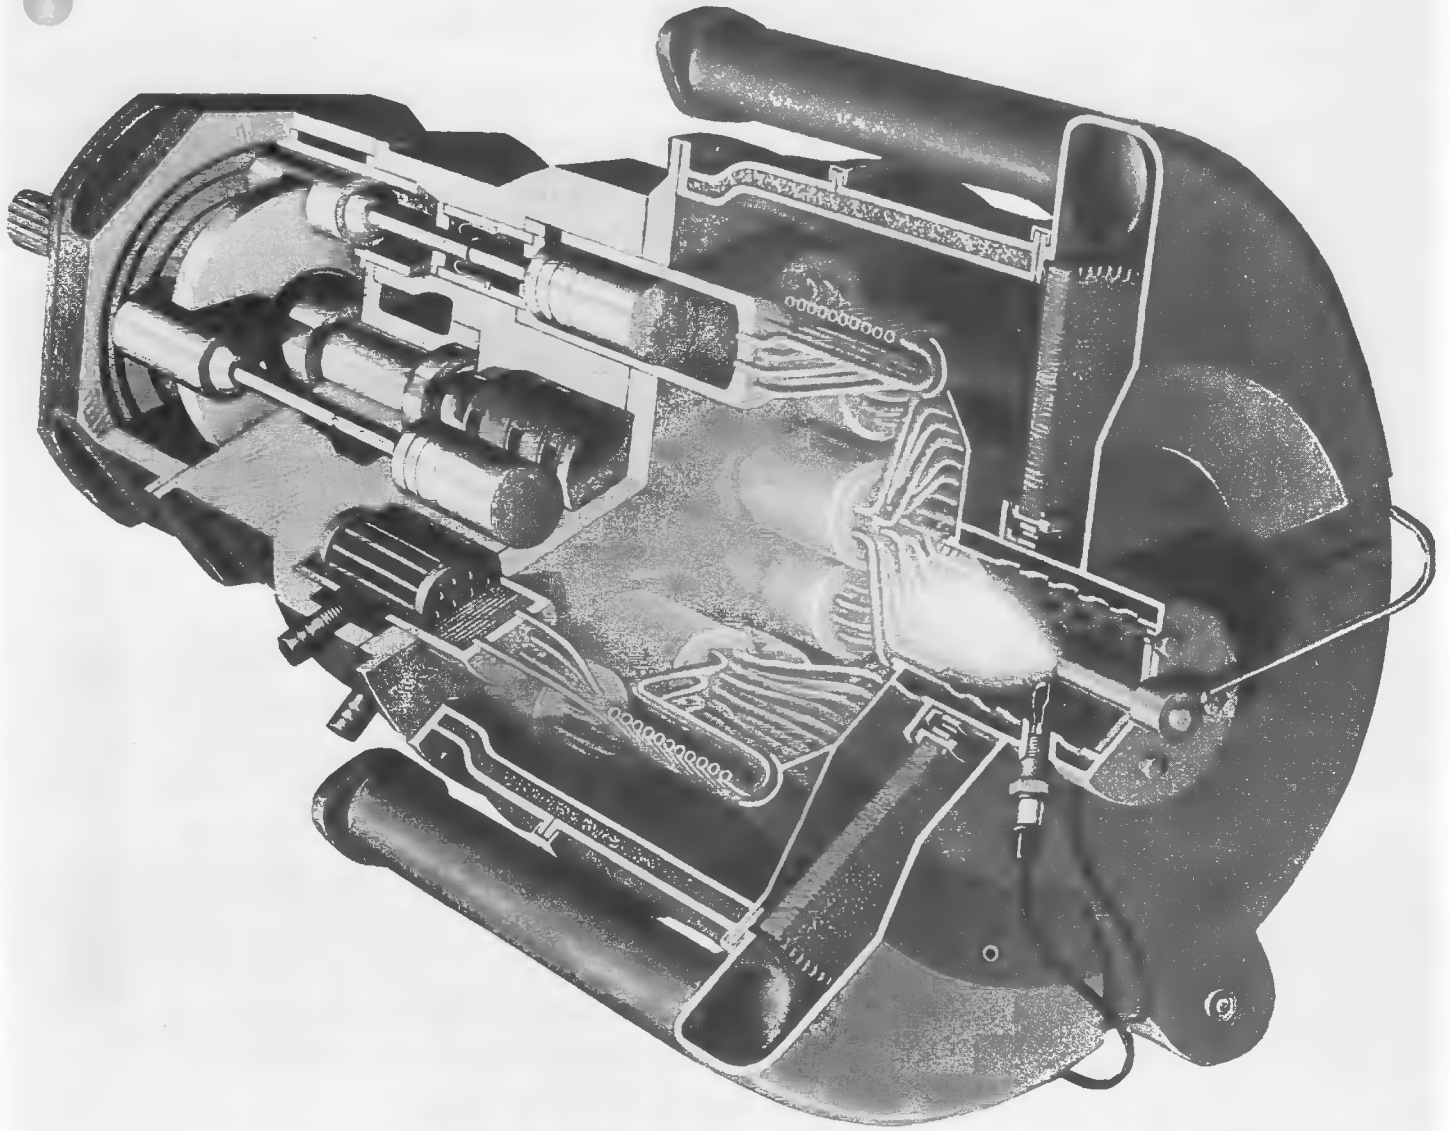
Cutaway Pictorial View of Ford-Philips Swashplate Engine
